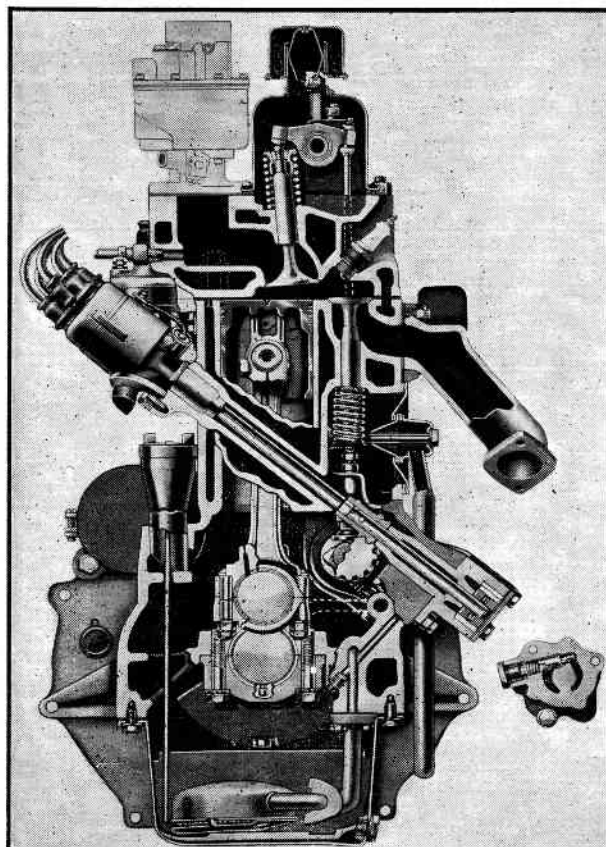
Position of valve stem guides in four cylinder L-Head engine
